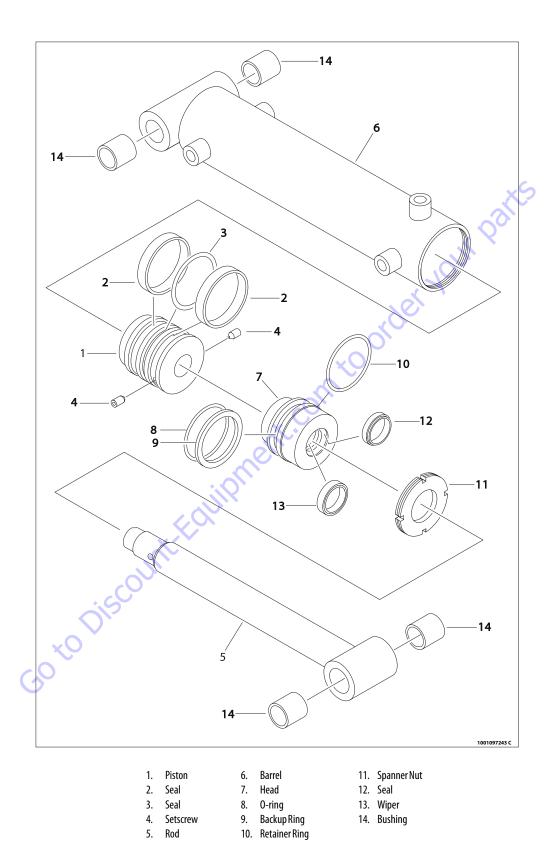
Steer Cylinder (S/N 0300142664 to S/N 0300183033)
